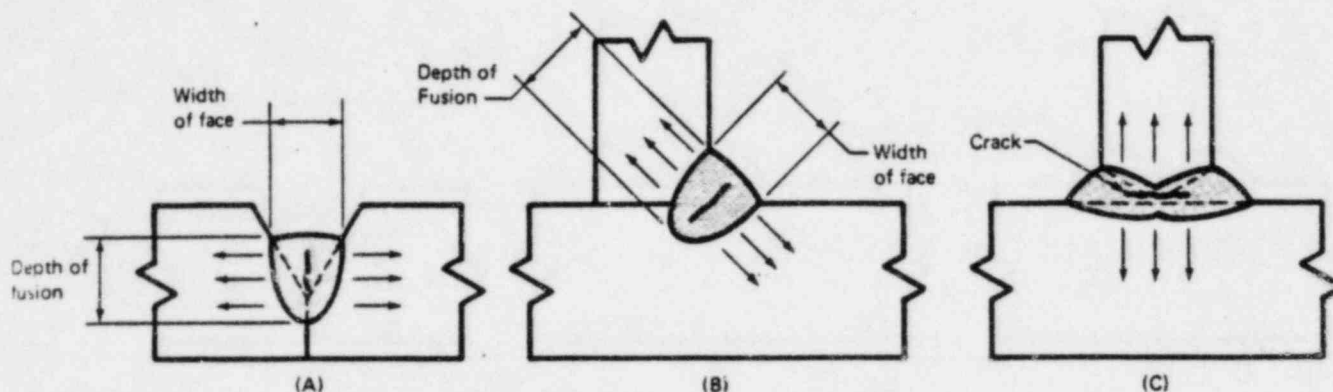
Examples of centerline cracking: (A) Groove weld; (B) Fillet weld; (C) Weld in T-joint
